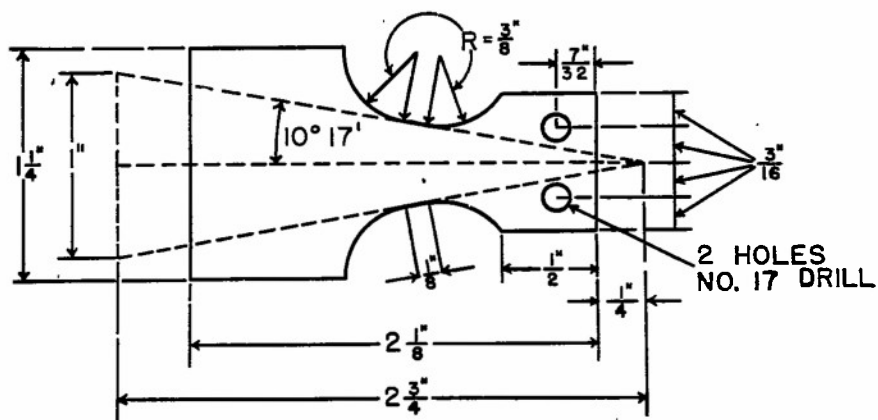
The design and dimensions of the specimens for tests in the Krouse flexural fatigue machines.
